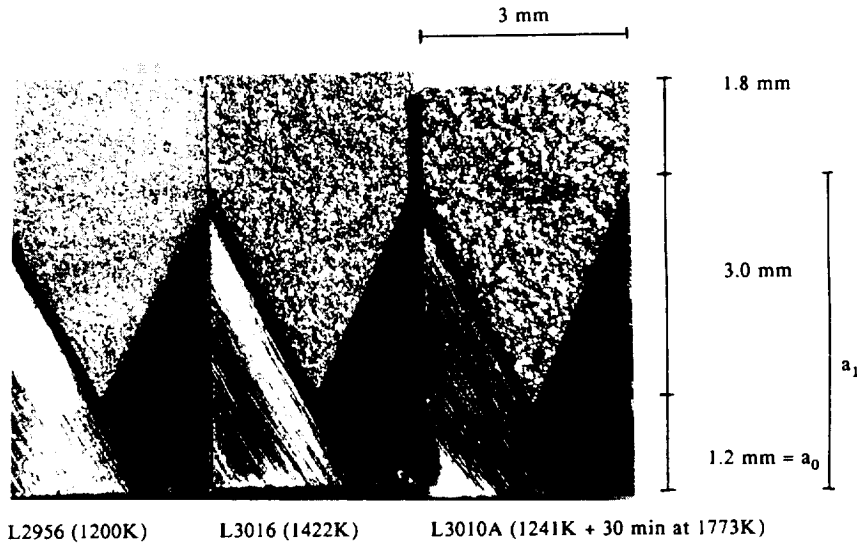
Examples of three fracture surfaces, and the nominal dimensions of the chevron-notch fracture toughness specimens. The thickness of the notch was 0.2 mm.
